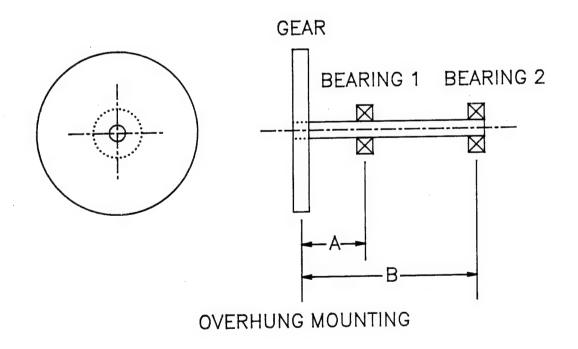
INPUT AND OUTPUT SHAFT MOUNTINGS
